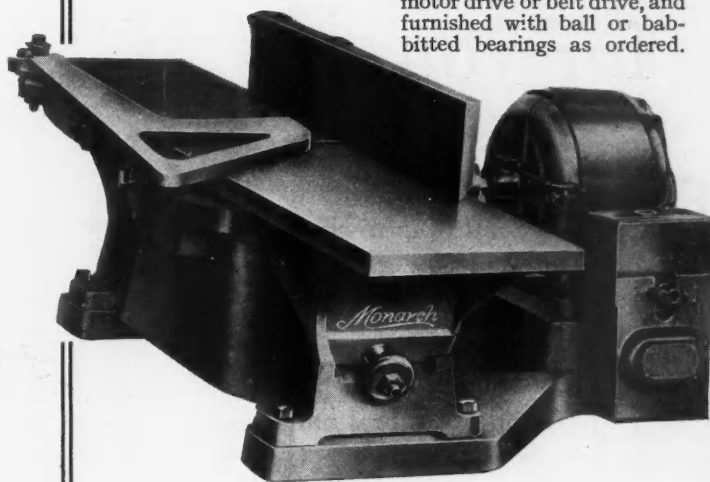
6" Bench Jointer. Strong, yet light, built for hard continuous industrial use. Arranged for direct motor drive or belt drive, and furnished with ball or babbit bearings as ordered.
